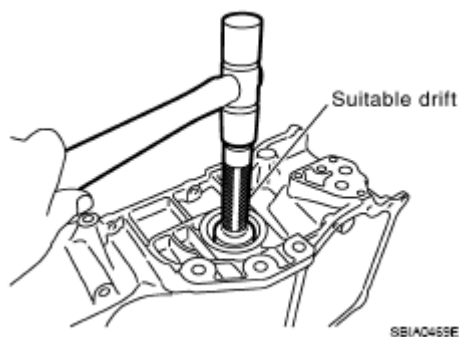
Removing Axle Pipe From Oil Pan (Upper)
